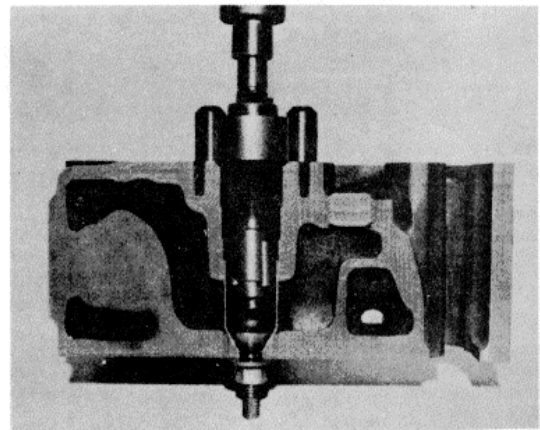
N10222T-880 in upper injector sleeve bore
